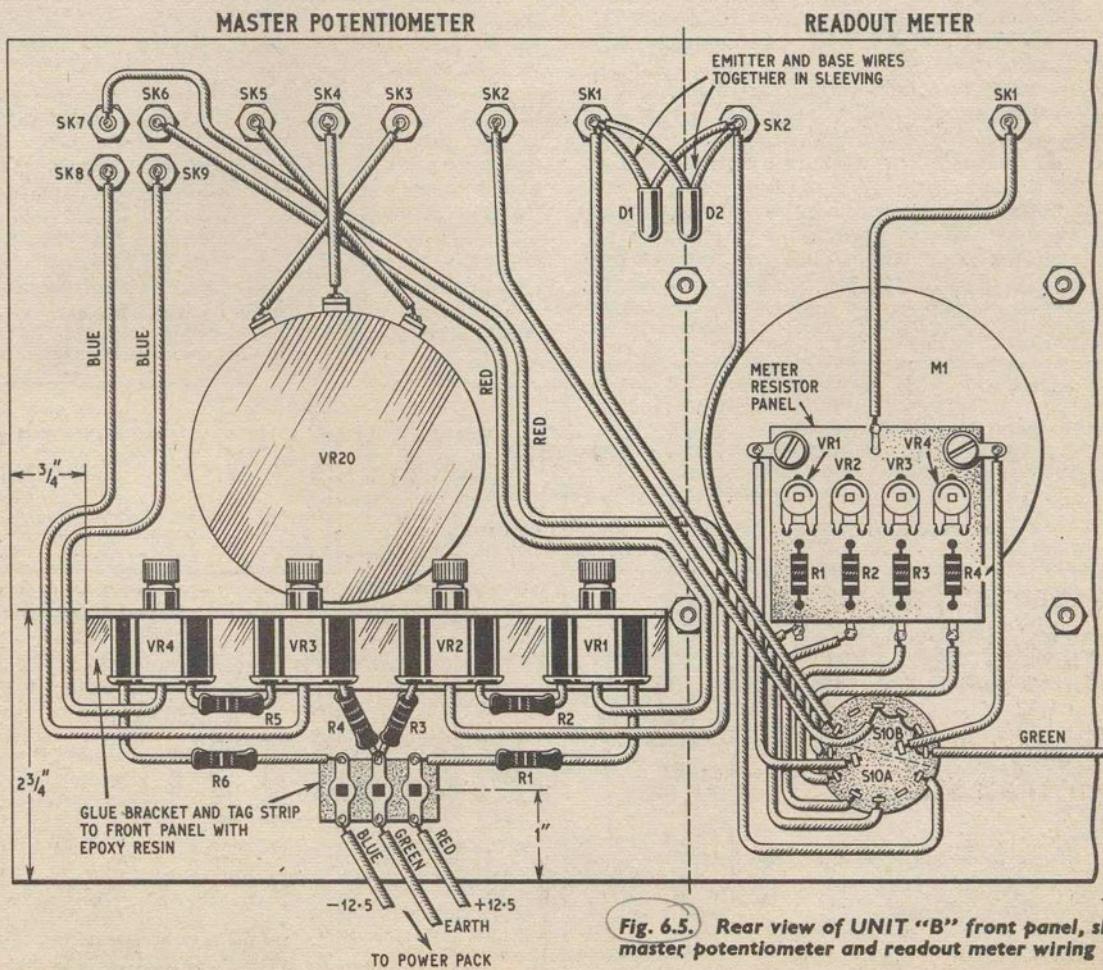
Rear view of UNIT "B" front panel, showing master potentiometer and readout meter wiring
